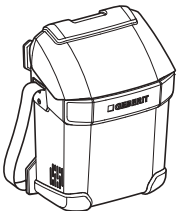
Geberit electrofusion welding machine ESG 3
